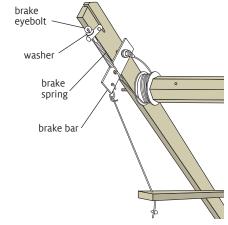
INSTALL BRAKE EYEBOLT AND SPRING
